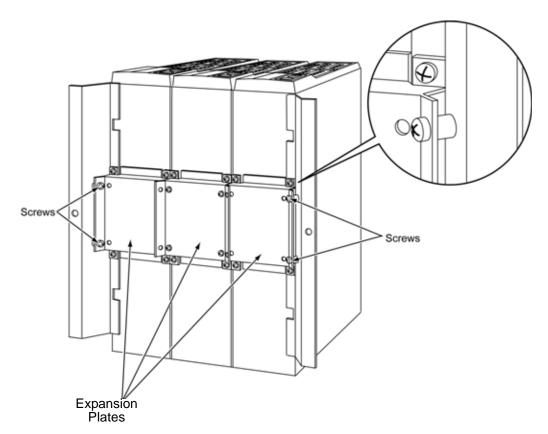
Install Additional CHS2U STAND KIT (EXT)
